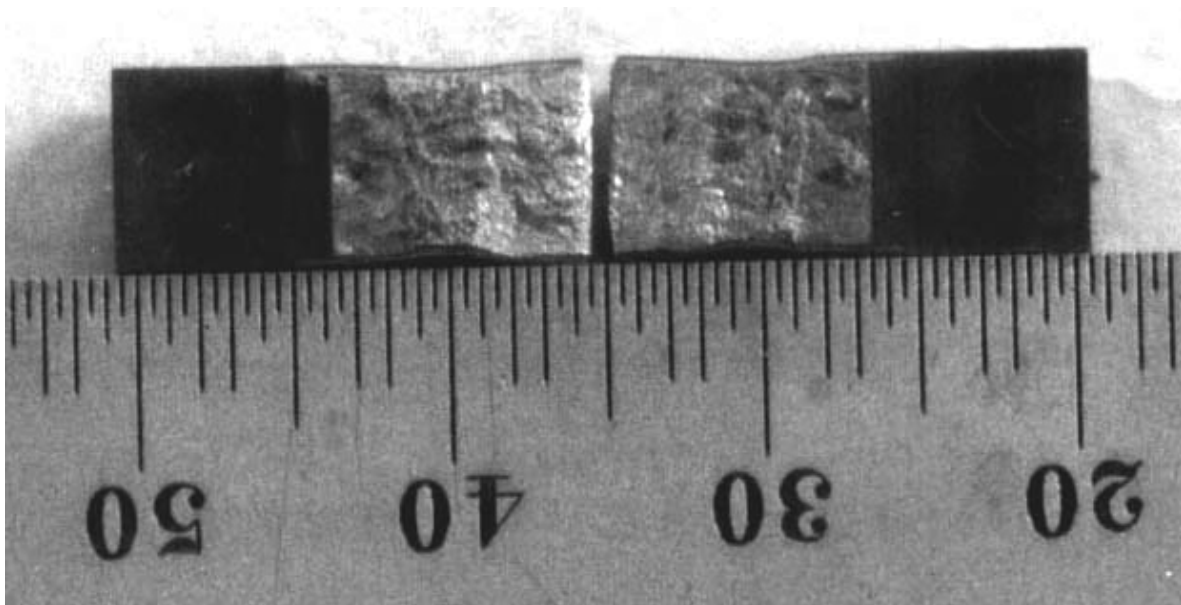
Fracture surface of specimen 75-10T tested at 288°C
